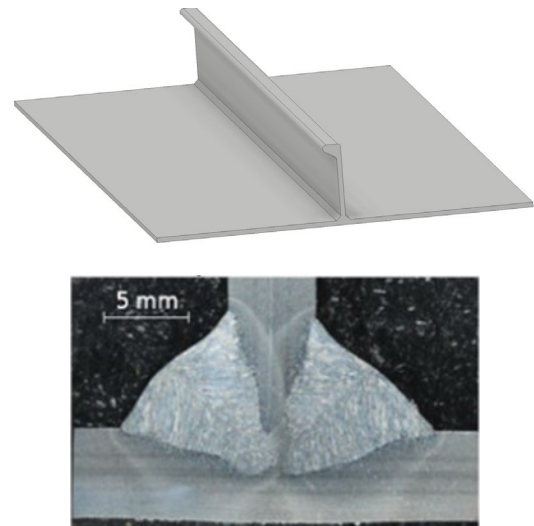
ABOVE: VIEW OF NOMINAL WELD GEOMETRY, BELOW: CROSS-SECTION OF FILLET WELDS
